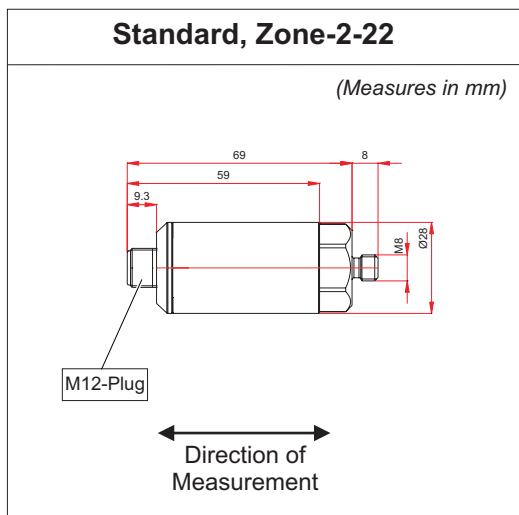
Housing Dimensions and Direction of Measurement: Standard, Zone-2-22.
